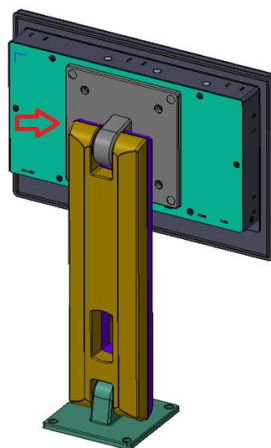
Assembling the VESA / desktop kit to the panel PC
